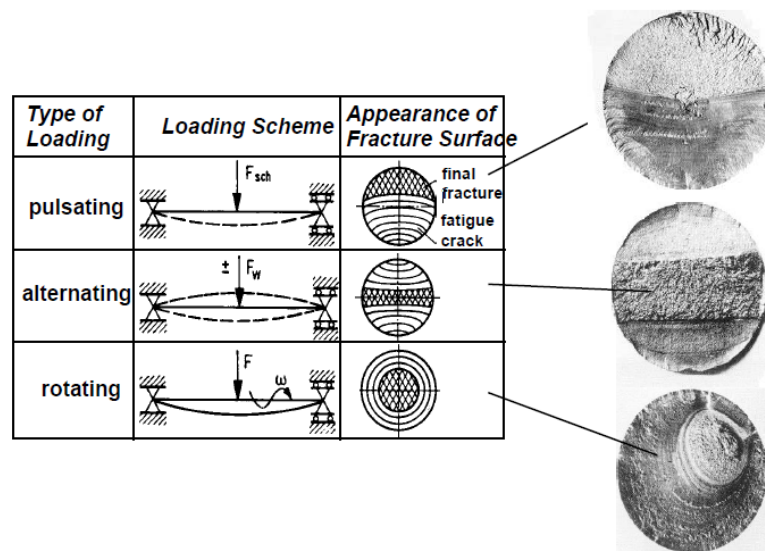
Fatigue loadings and the type of fracture surfaces [39].
